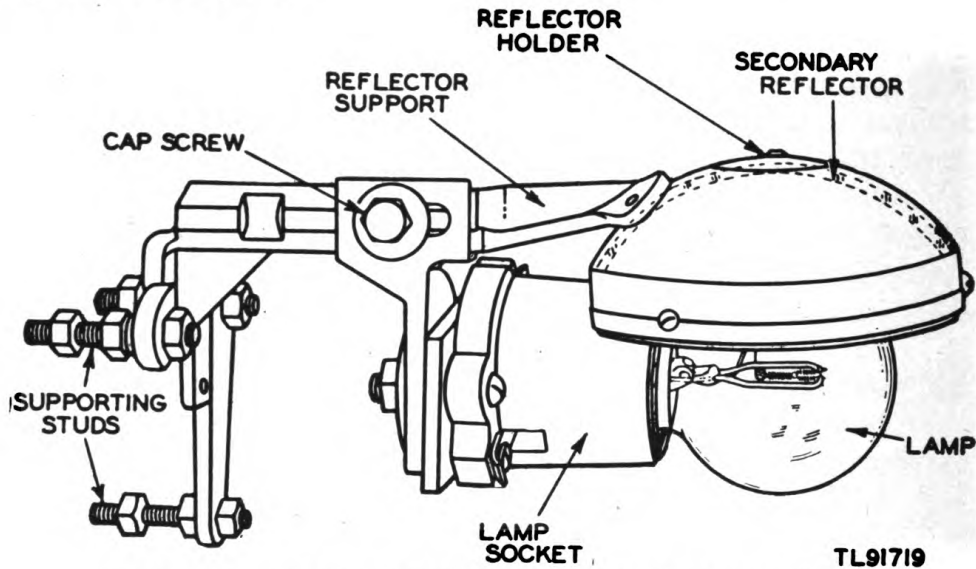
Lamp socket assembly, Ceiling Light Projector ML-121-D.
